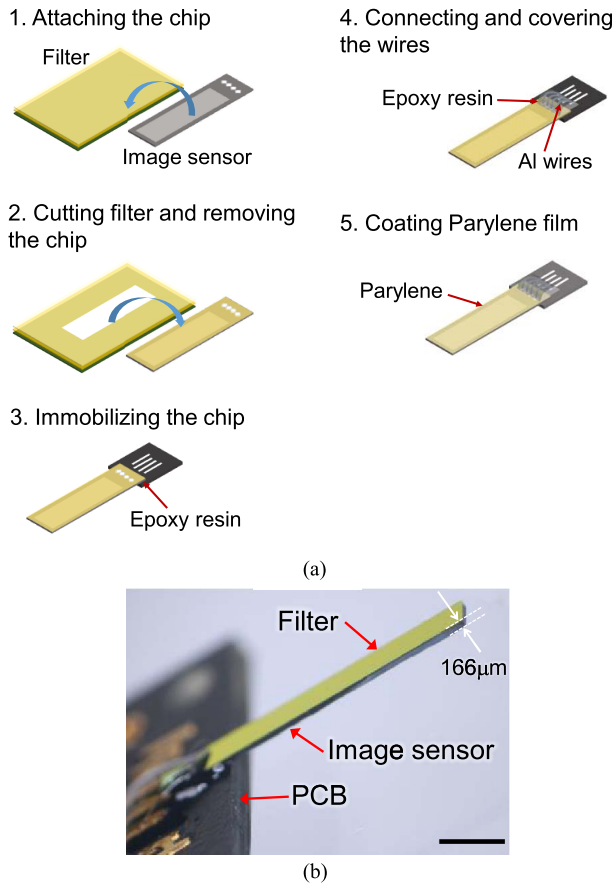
(a) Fabrication of imaging device started from (1) chip and filter attachment, (2) filter transfer using laser lift-off technique, (3) chip and PCB assembly, (4) electrical wiring, and (5) Parylene coating for sensor protection. (b) Photograph of fabricated image sensor comprises image sensor, composite filter, and PCB. The device thickness is $166 \mu\text{m}$ and scale bar is 1 mm.
